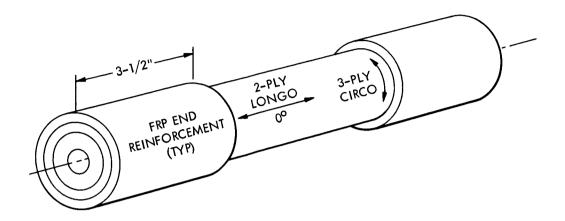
Glass Cloth Tensile Cylinder Ready for Metal Sleeve
